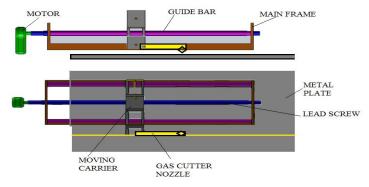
Proposed arrangement for GAS CUTTER MECHANISM.
